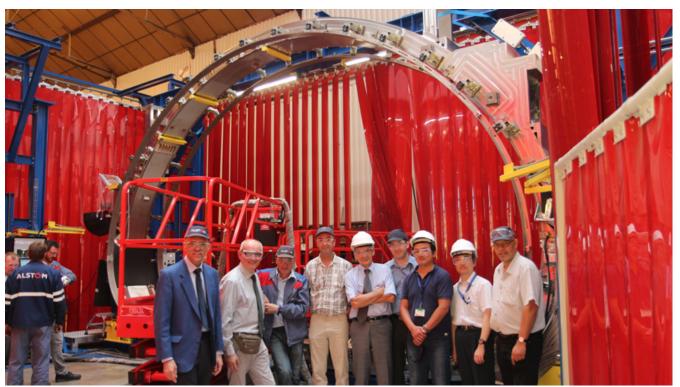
Group photo taken in front of a TF casing with the welding machine rails mounted
